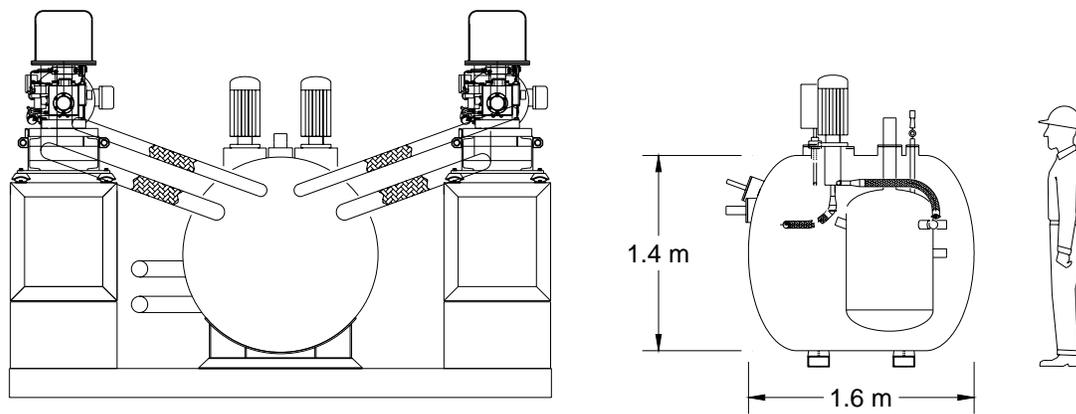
Scaled mechanical drawing of cold box and skid arrangement
